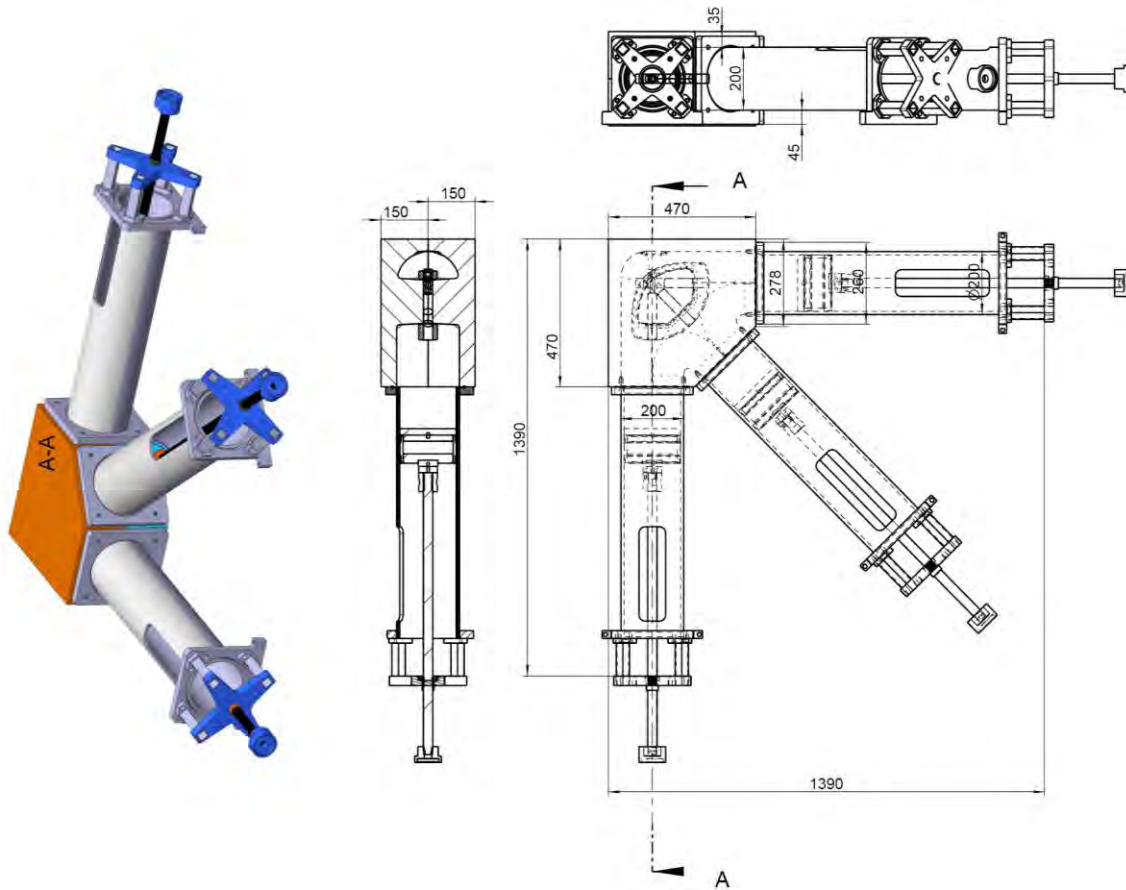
Technical drawing of vacuum pressed fabrication of WFC joints (Prototype)
